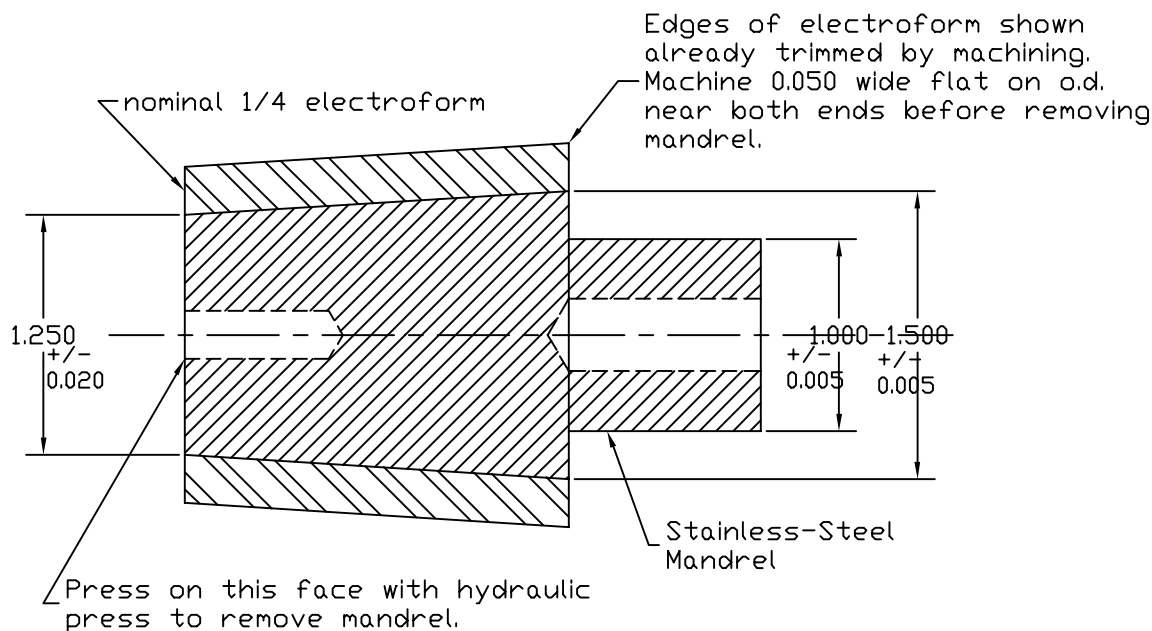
Section Drawing of Test Mandrel for Electroforming. Full Scale. Dimensions in Inches
